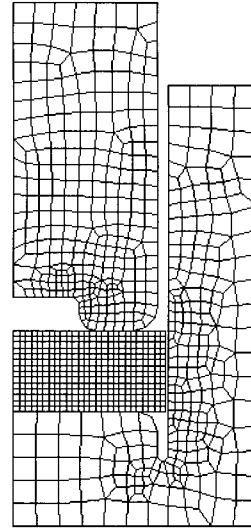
Finite element meshes for the workpiece and tools used in the pre-analysis of 6061 aluminum alloy wheel forging processes
